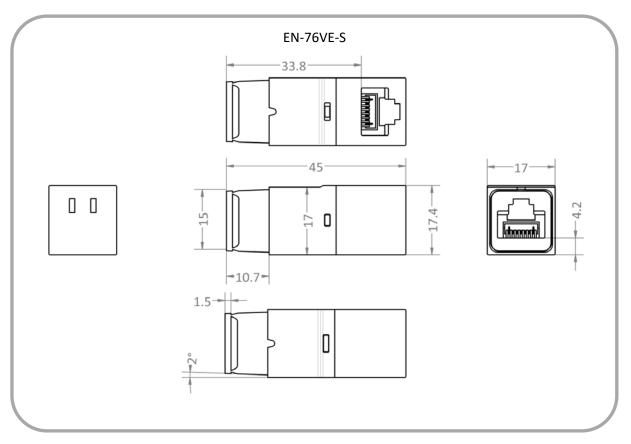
Technical drawings for EN-76VE-S. All dimensions are in millimetres.
